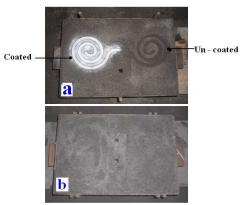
Green sand moulds made to investigate the fluidity a) cope and b) drag
